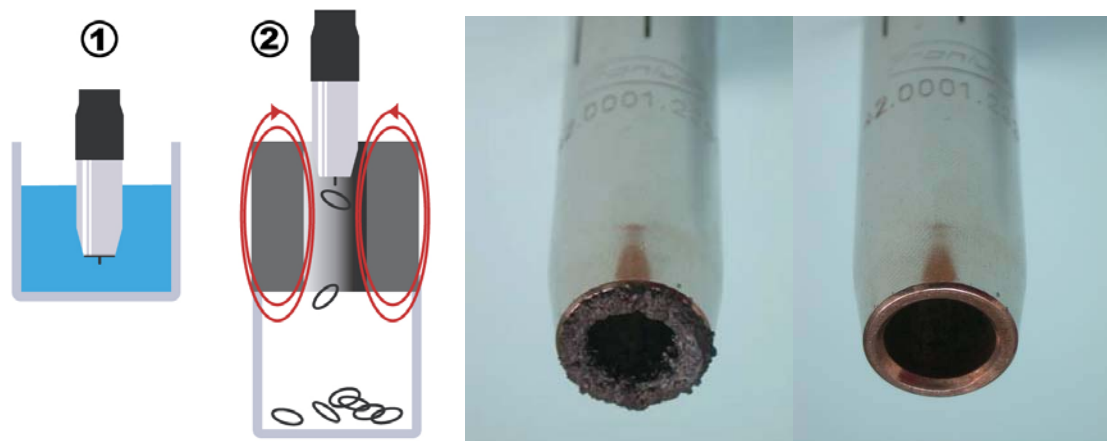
Principle of Robacta Touchless Cleaner and removed spatter ring.
